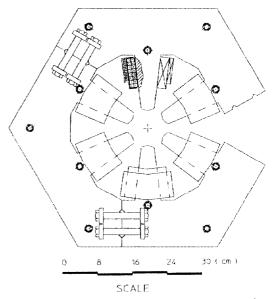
End view and coil configuration of the storage ring sextupole magnet.
